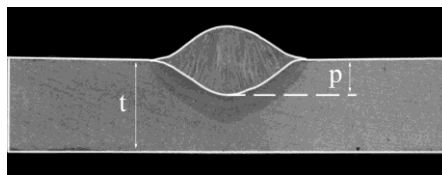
Macro photograph of a bead on plate weld specimen (p: penetration depth, t: material thickness)
